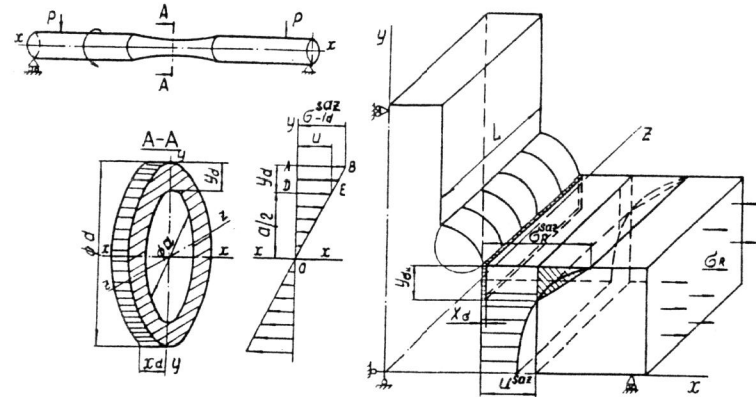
The determination of stress similarity factor for smooth specimens and welds
